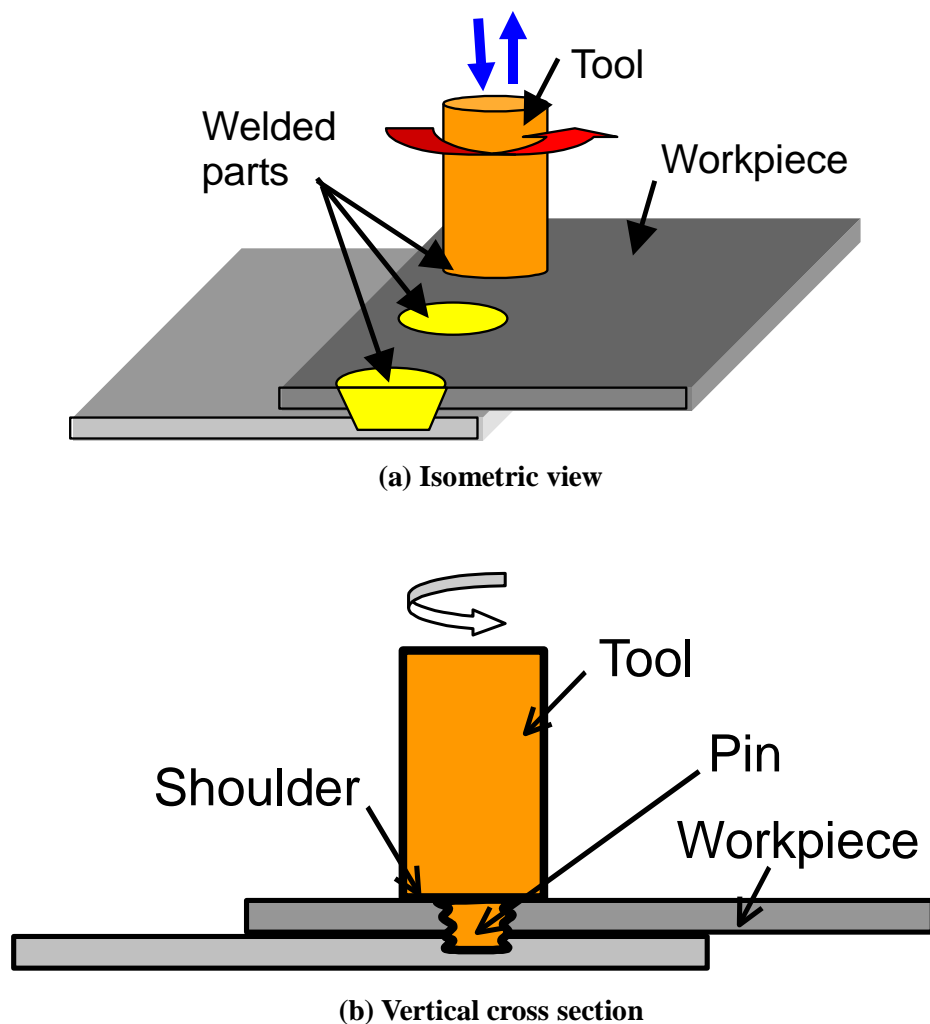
Schematic view of friction stir spot welding (FSSW)
